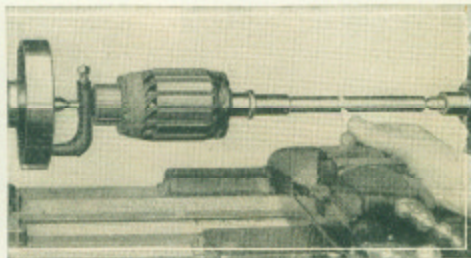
Testing a Bent Armature Shaft in a 9-inch South Bend Lathe
